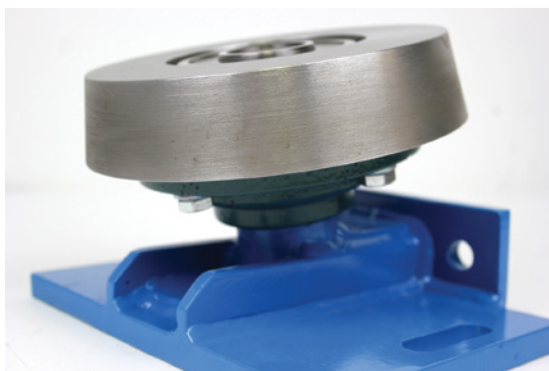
Plants should keep wear-critical parts, such as this thrust-roller assembly, on hand for faster replacement
